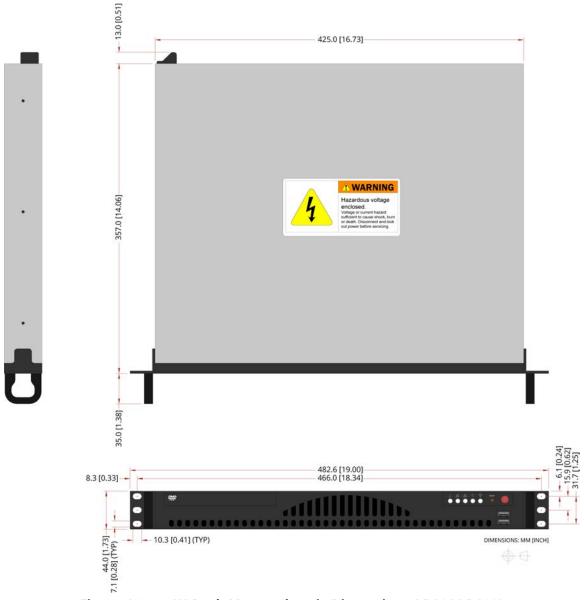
1U Rack Mount Chassis Dimensions (-R101/-R102)
